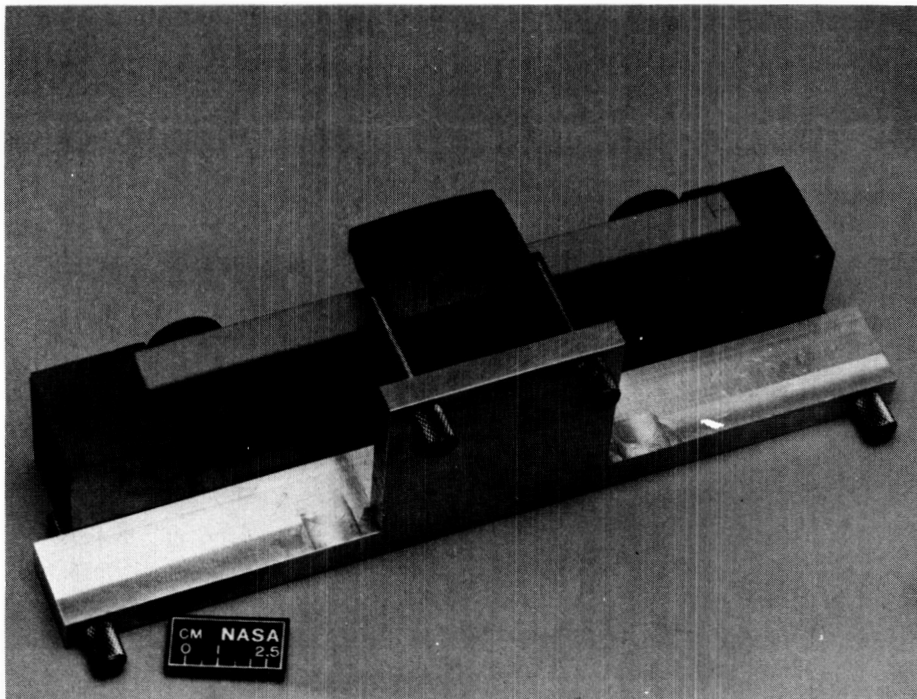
Elevated temperature flexure test fixture with centering fixture.
